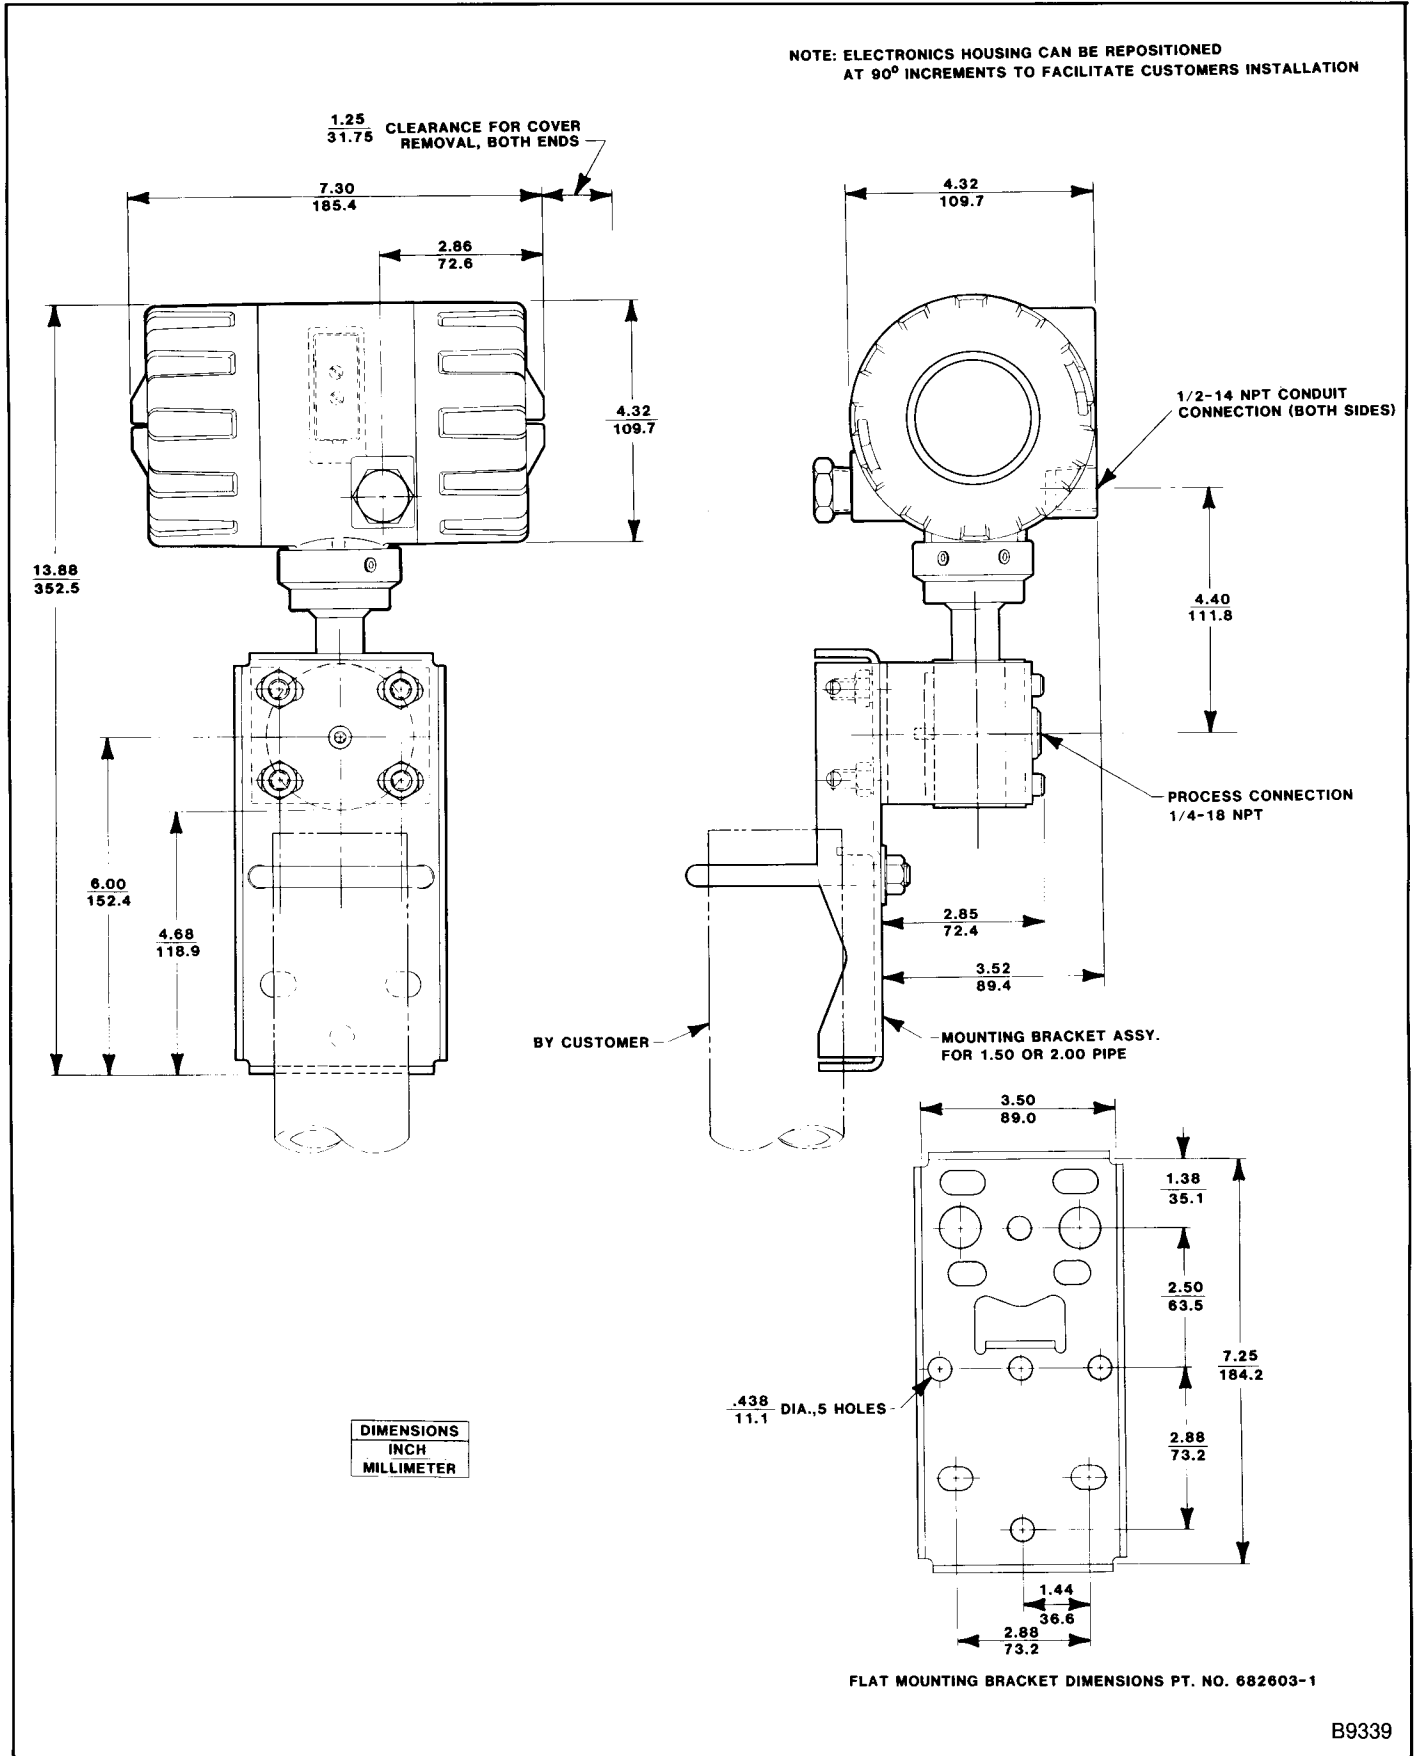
External and Mounting Dimensions (BC2/3/4, BC53/54/55, and BC64/65)
